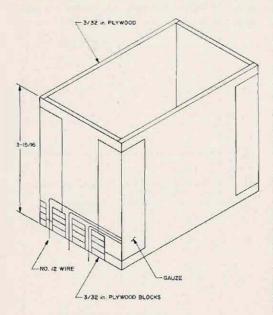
Bobbin. Note: Adjust the inside dimensions of the bobbins to fit the core that you have constructed. The bobbin shown is the one for the secondary in which three 12-gage wires are wound together. For the primary, only one wire slot is required.
